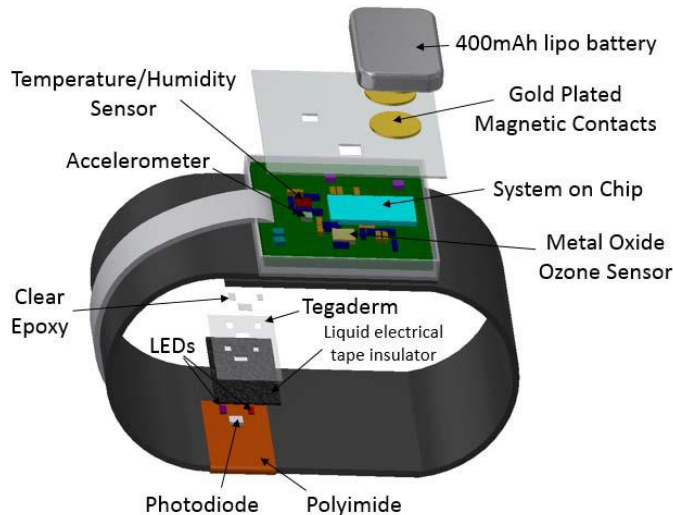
Exploded view of the wristband device, including the layers of the optical probe.
